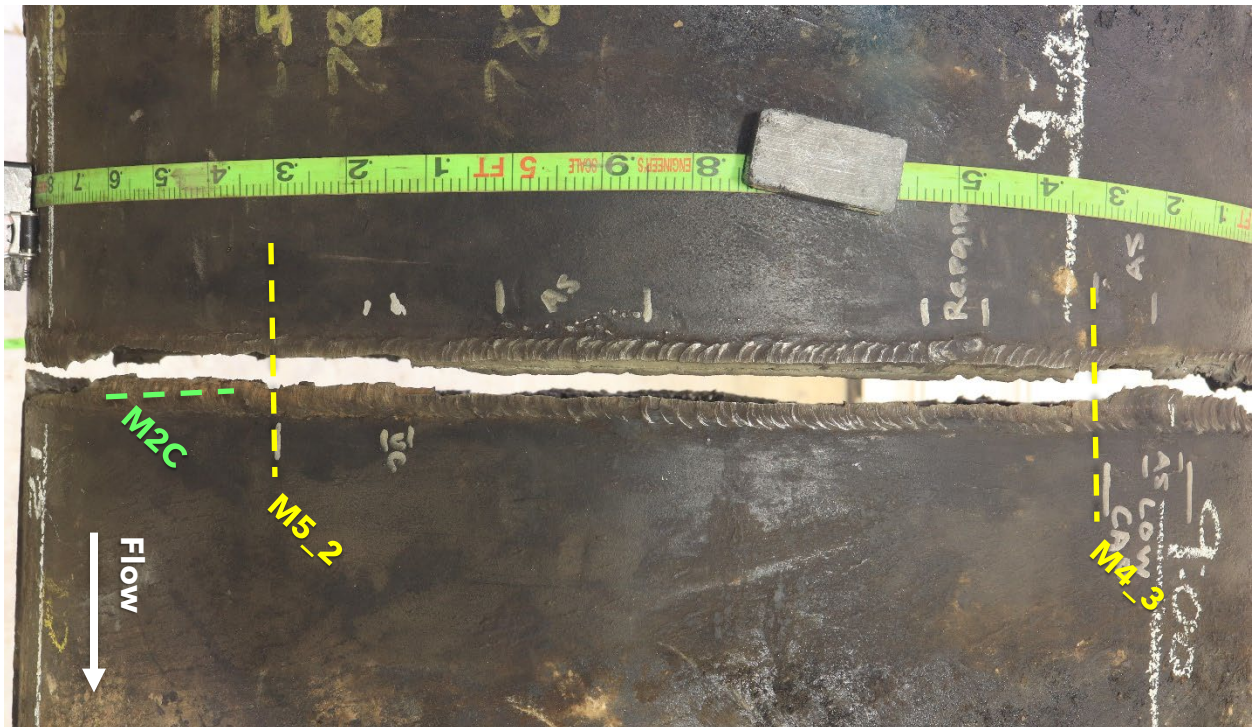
View of the mating fractured of Pipe 1 and 2 between the 12 and 9 o'clock position.
